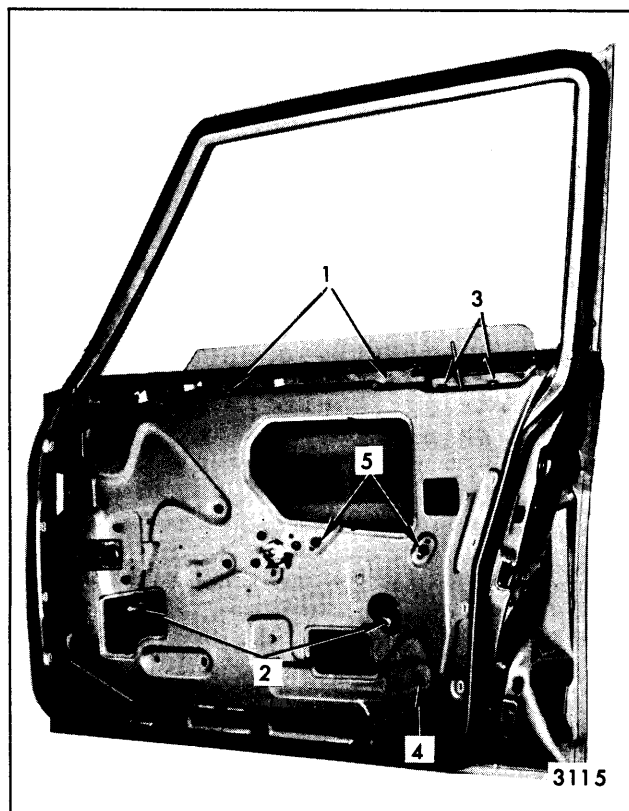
Window Removal and Adjustment - "B-69" Styles
